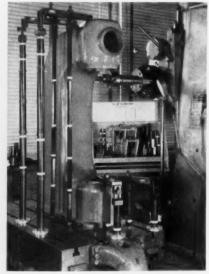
Example of typical work setup using components of Hi-Lo clamping system.
